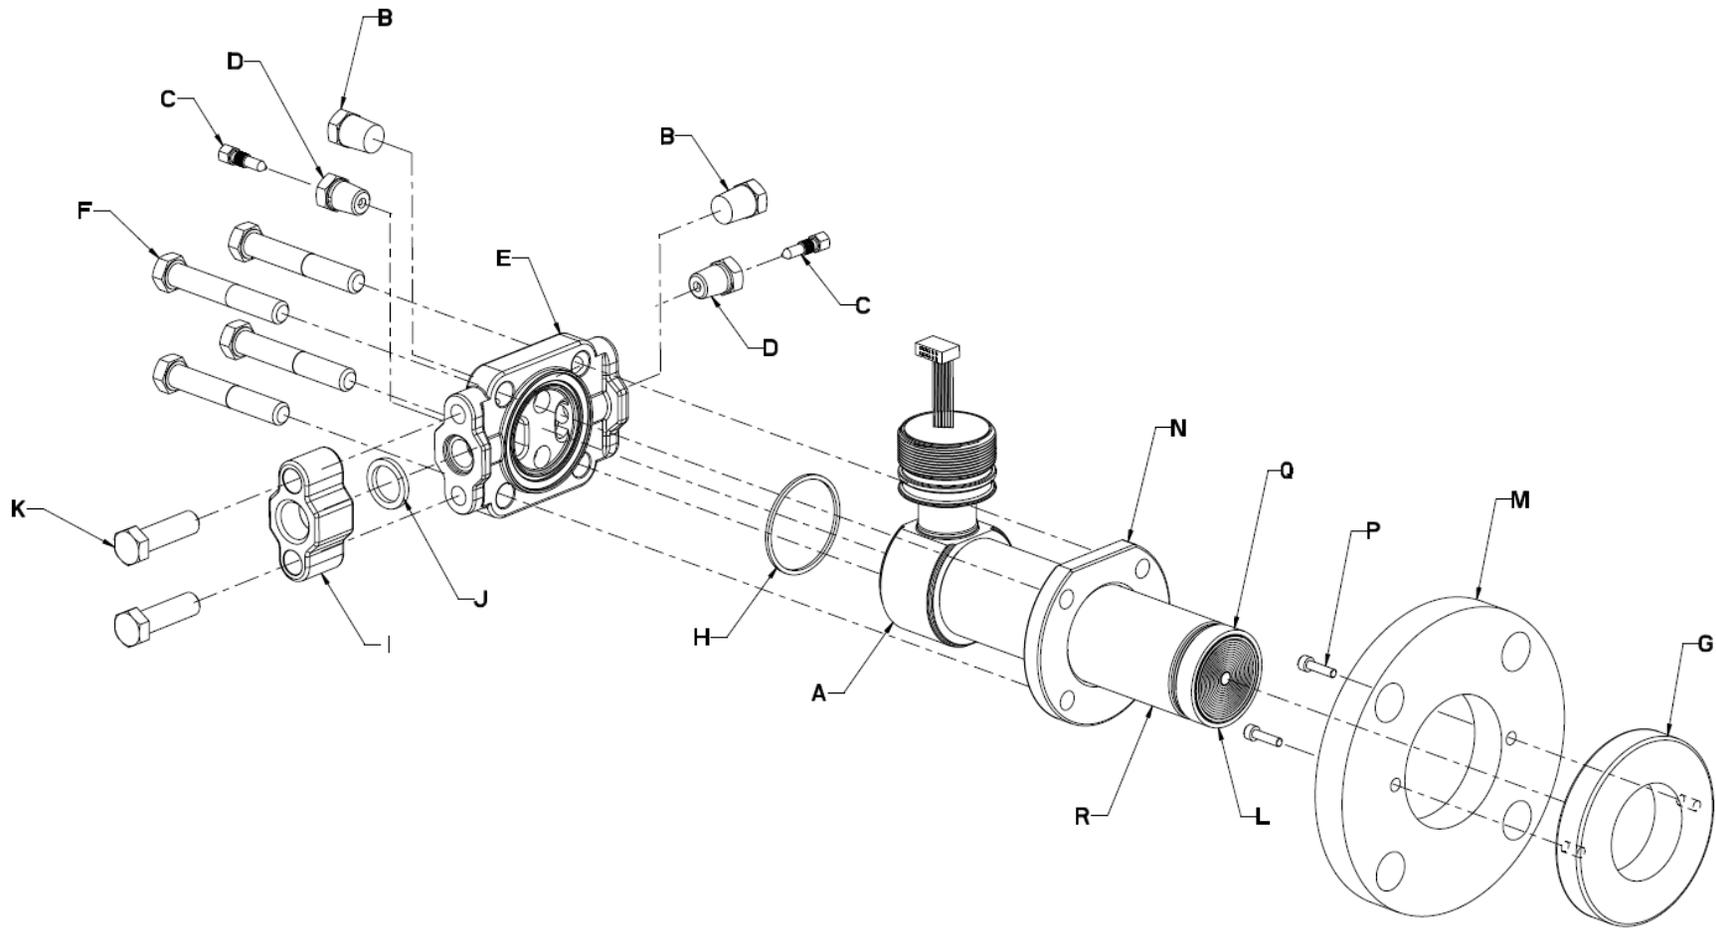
Schematics of flange mounted transmitter assembly of extended diaphragm
